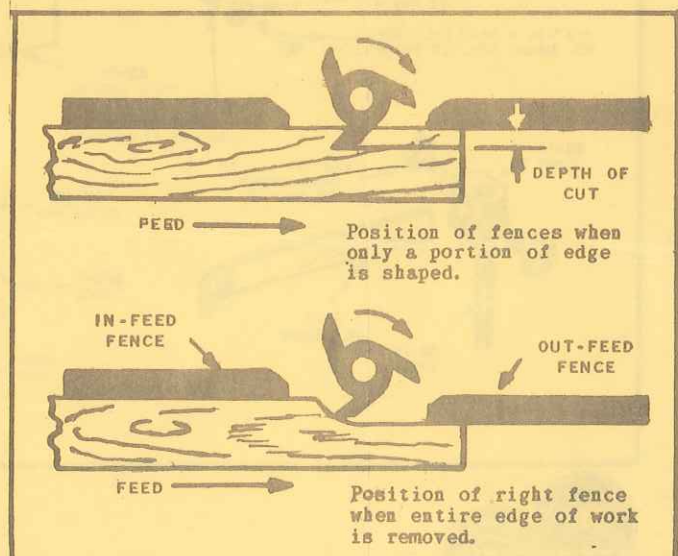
Diagram Shows How Shaper Fence Must Be Adjusted For Various Cuts.
